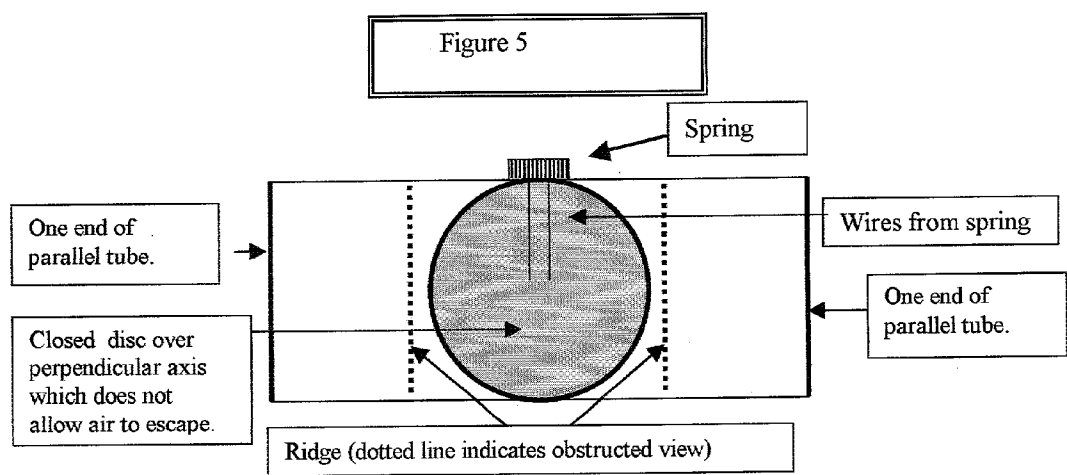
A: Safe t-Tube with disc closed. Perspective is looking at the perpendicular cylinder.
